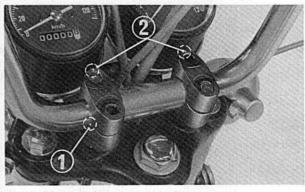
(1) Punch mark on handlebar (2) Punch mark on upper holder
